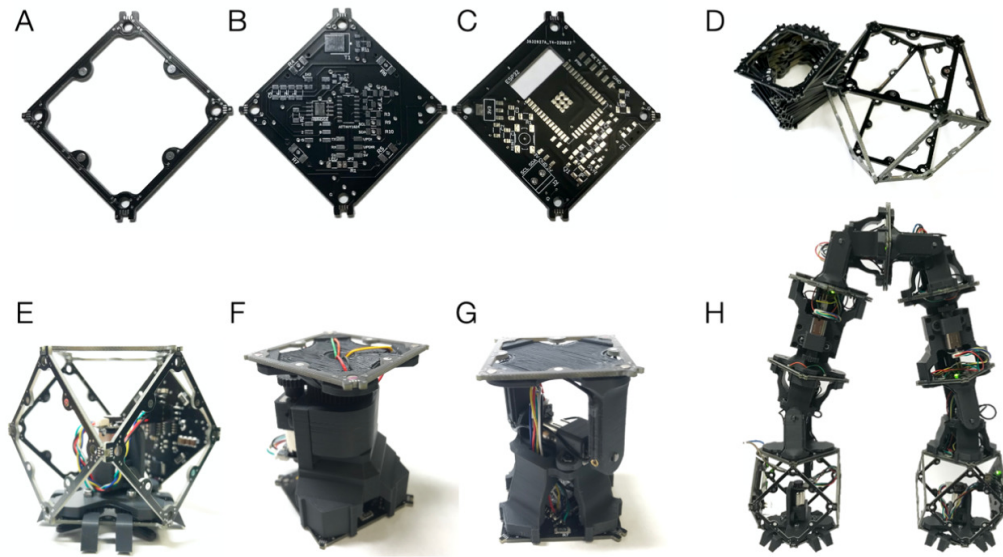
Components of the gearmotor version of the assembly robot. A) functional voxel face (the same as used in the servo version); B) ATtiny1624 face; C) ESP32 face; D) Assembled functional voxel; E) Gripper; F) Wrist; G) Elbow; H) Assembled robot.
